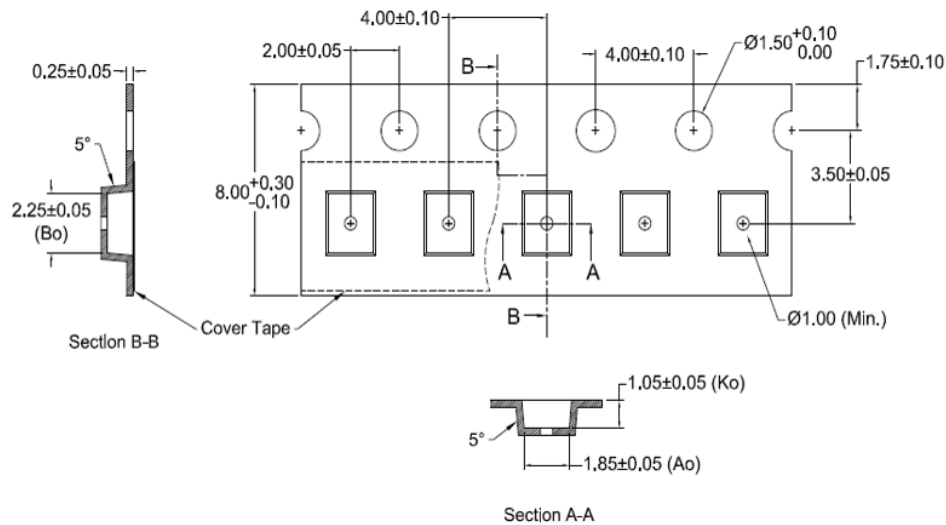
Pocket Tape dimensions for LUXEON CZ ES Color Line
